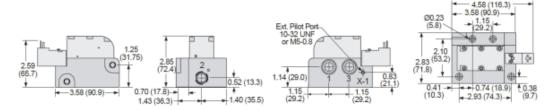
10500-3520-MC31 3520 C multiplexer valve accessory - dimensions in inches [mm]
